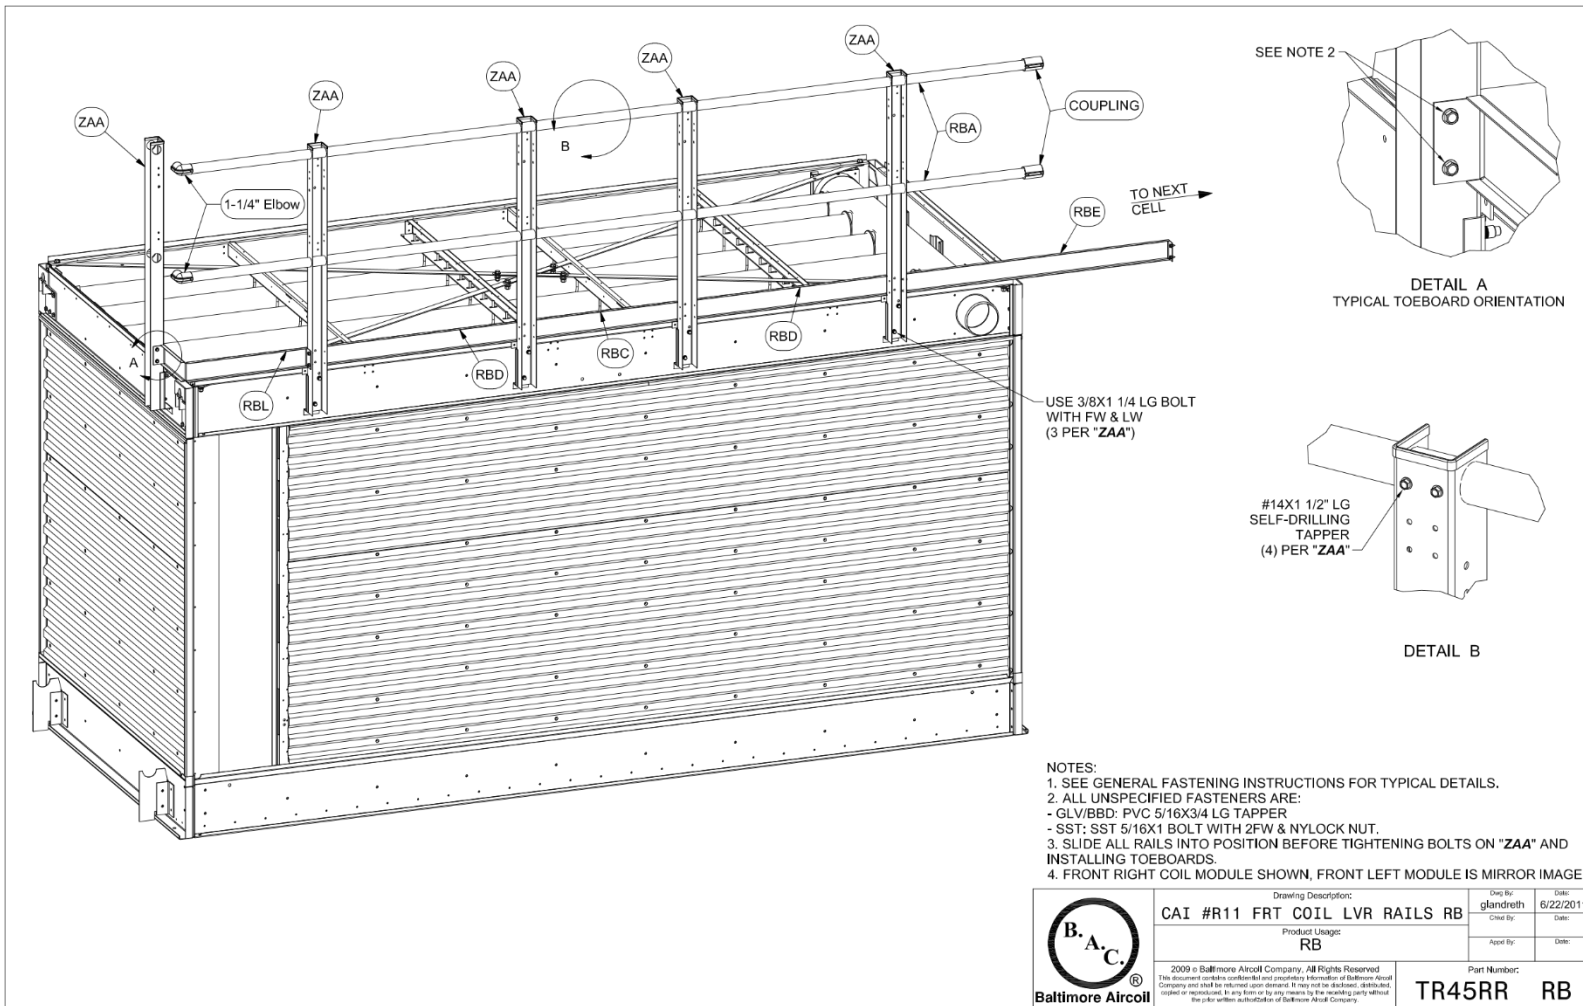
TR45RR Louver Face Railing Installation on Multi-cell Front Unit, No Ladder Opening
